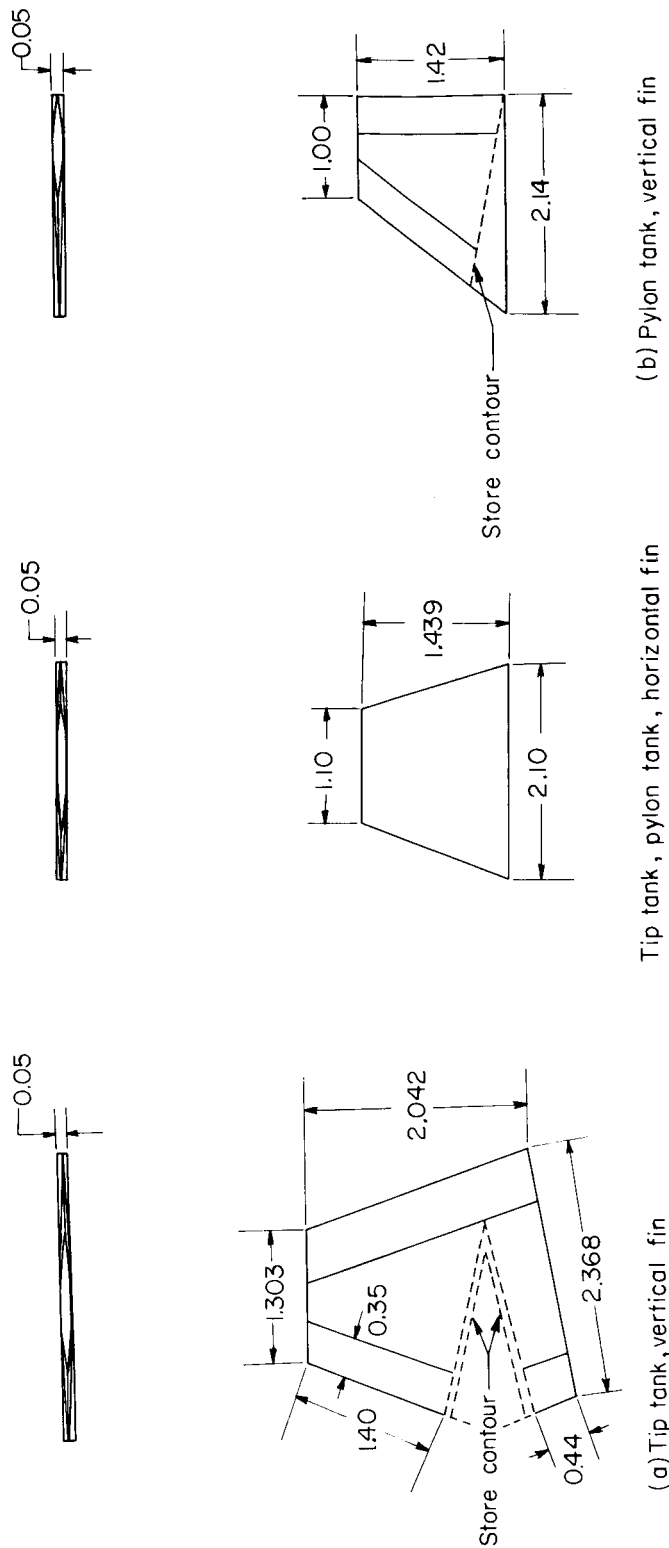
Dimensions and details of pylon and tip tank store fins. All dimensions are in inches.
